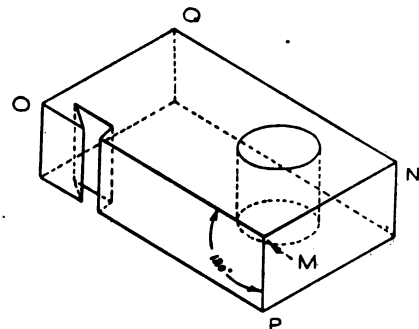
ISOMETRIC DRAWING OF BLOCK, SHOWING CYLINDRICAL HOLE AND MORTISE.
